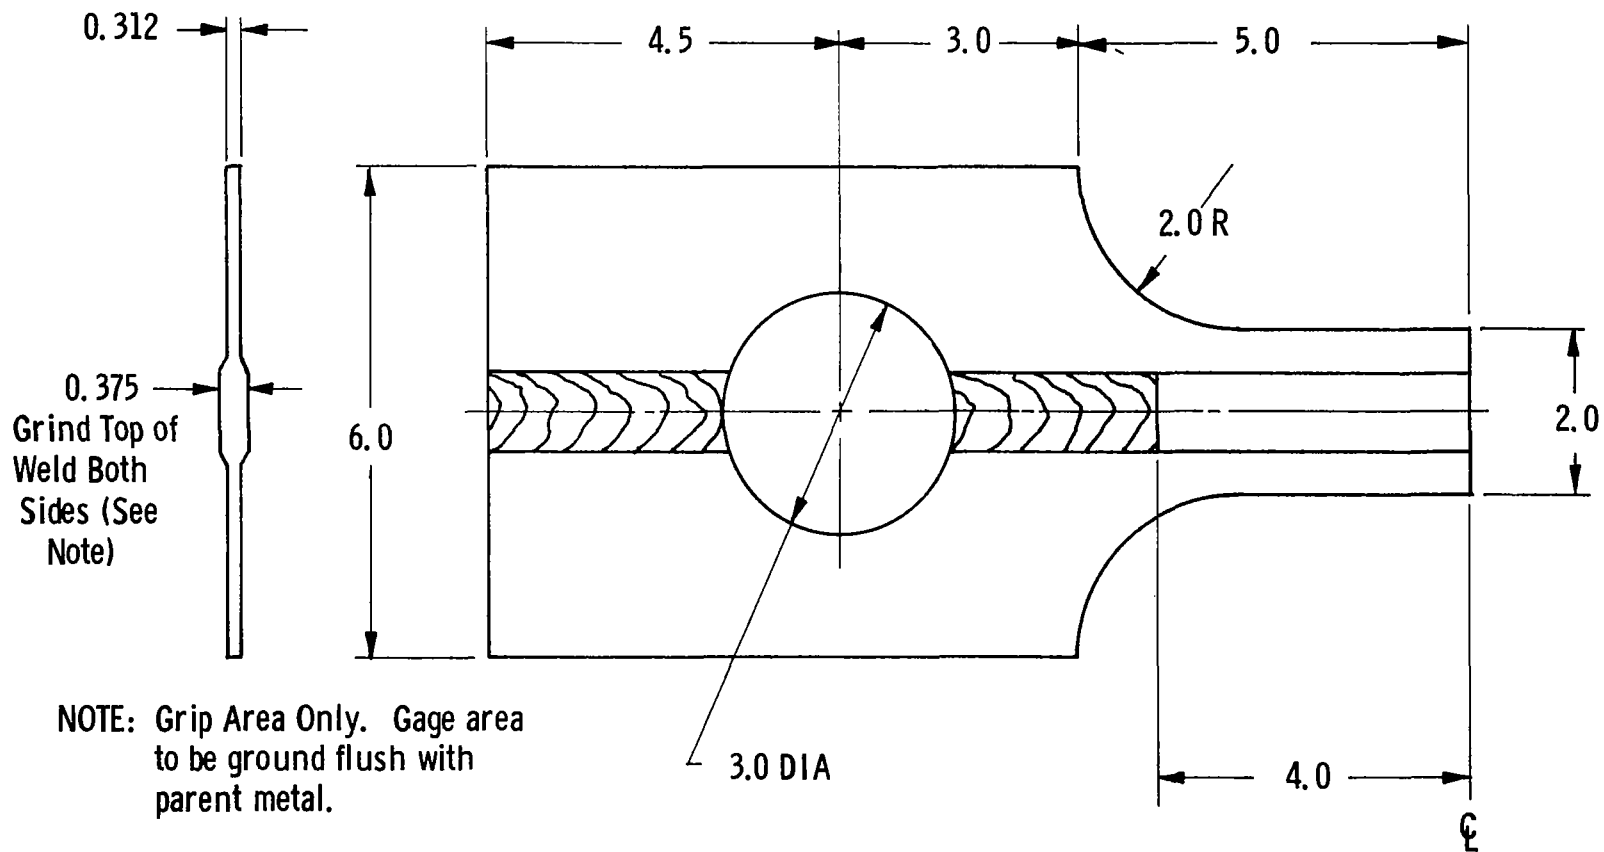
Longitudinally Welded Unflawed and Part-Through-Crack Tension Specimen.
